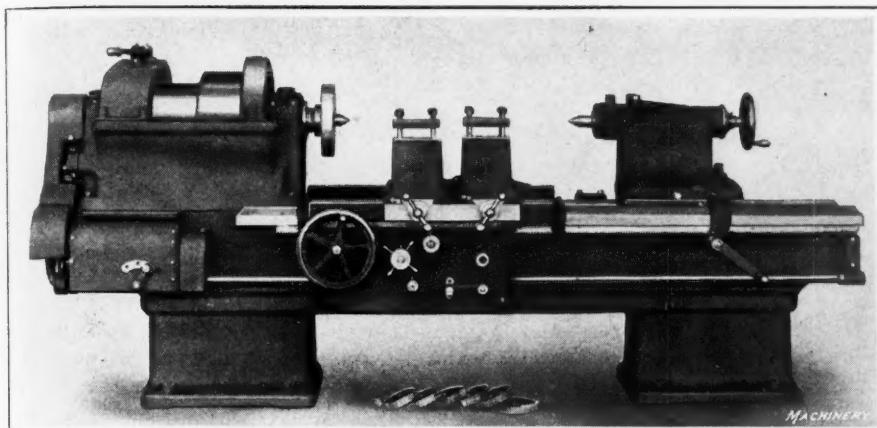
Shell Turning Lathe made by the Sidney Machine Tool Co.
